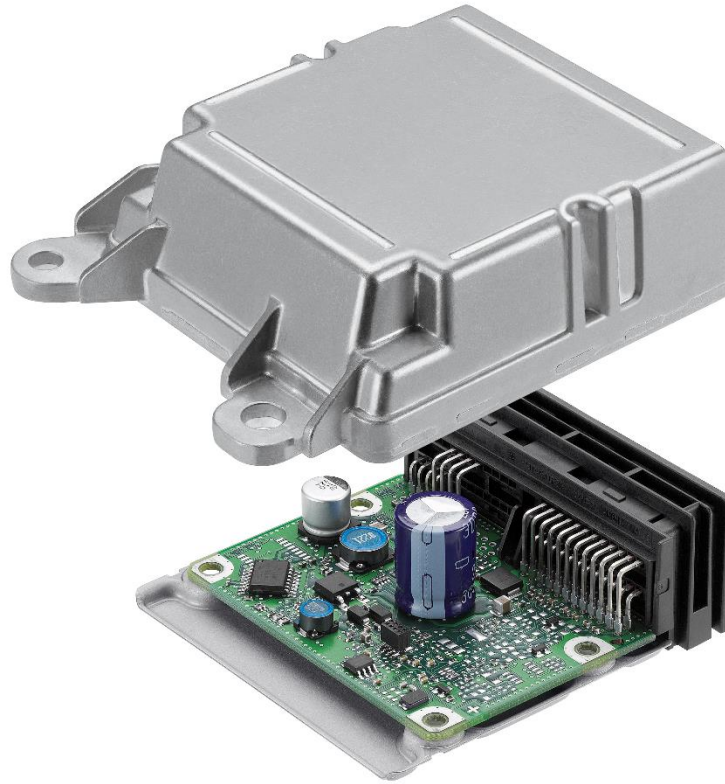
Magnified view of an Airbag Engine Control Unit. Printed Circuit Board with assembled components, attached plug for connection outward of the housing [14].
